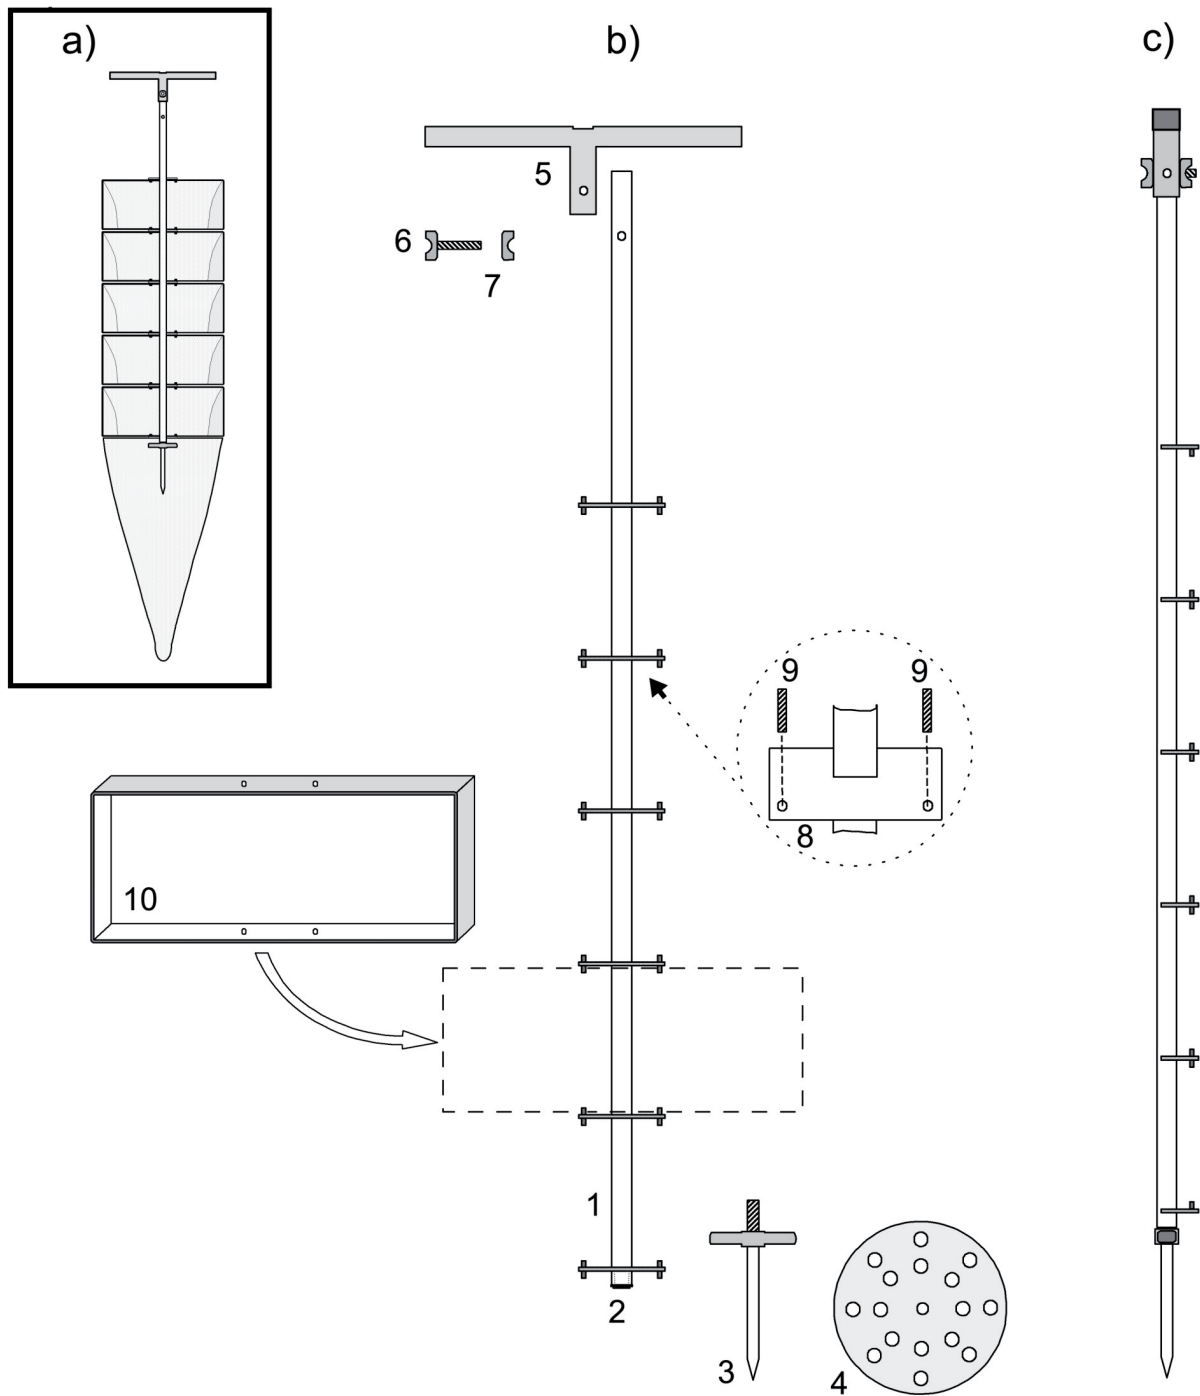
Stratifying drift sampler: a) apparatus in the assembled state, front view; b) sampler construction, back view: 1 – upright, 2 – bushing, 3 – "anchor", 4 – supporting disk, 5 – T-handle, 6 – butterfly bolt, 7 – butterfly nut, 8 – CTNH's perpendicular plate, 9 – CTNH's screw-pins, 10 – net mouth frame. A frontal drilled hole in the vertical part of the T-handle can be seen; c) apparatus without nets, side view. A lateral drilled hole in the T-handle's vertical part can be seen. See text for explanations.
